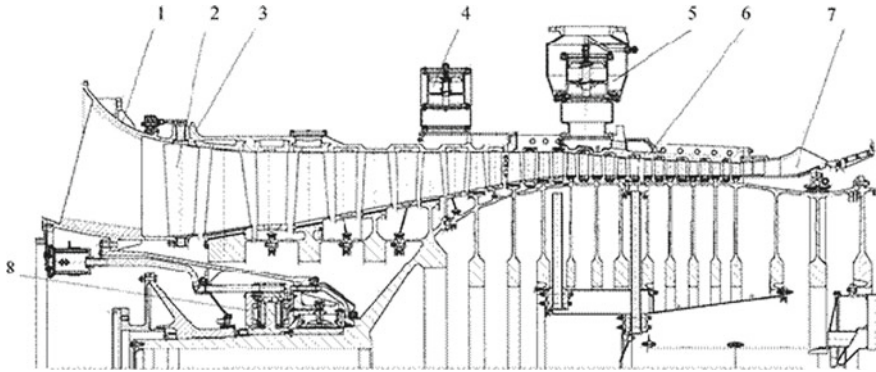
Compressor of GTD110 engine 1—inlet casing; 2—inlet guide vanes; 3—casing of the 1–5th stages; 4—bypass valve; 5—bypass valve with compensator; 6—casing of the 6–14th stages; 7—exit diffuser; 8—front bearing
